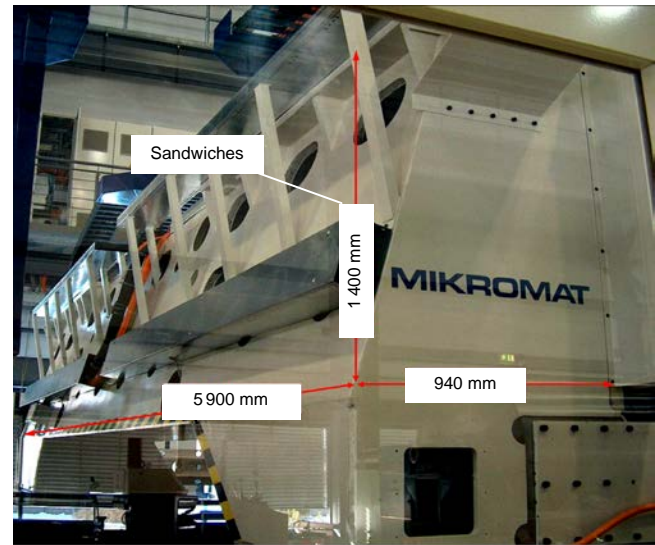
A portal of a milling machine for large tool manufacturing made of aluminum foam/steel sandwiches
